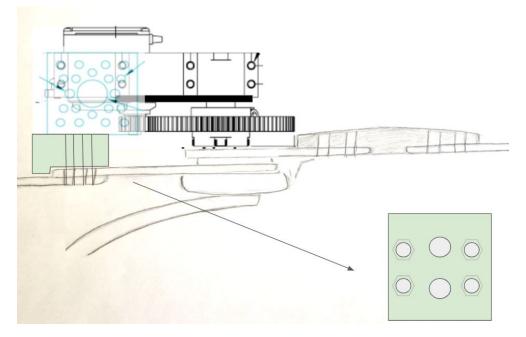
Sketch of the second design that shows how to attach the motor to the orthosis [40] [43].
